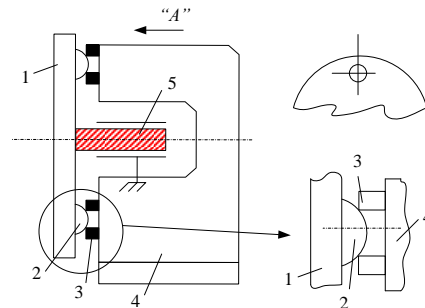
Schematic and model of laser deflector. 1 – mirror; 2 – spherical support; 3 – cylindrical permanent magnet; 4 – housing; 5 – piezoceramic plate with sectioned electrodes.
